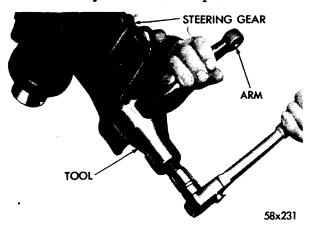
Removing Steering Gear Arm with Puller C-3646
